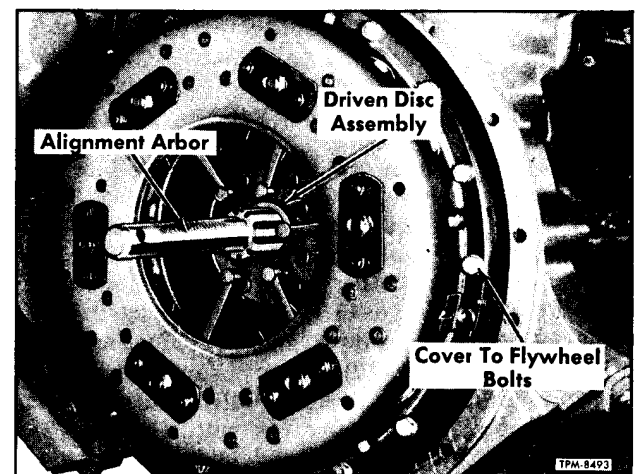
Clutch Cover Assembly Installed (Disc Aligning Tool Shown)
